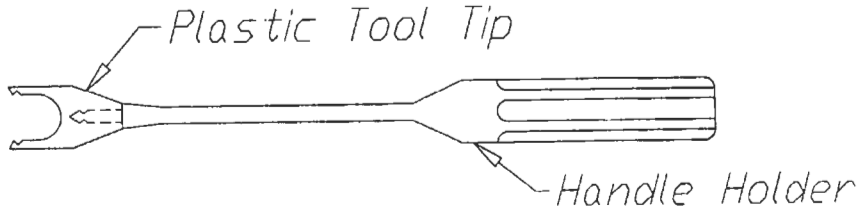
Schematic of a handle holder titanium 6Al-4V heart valve surgery tool.
